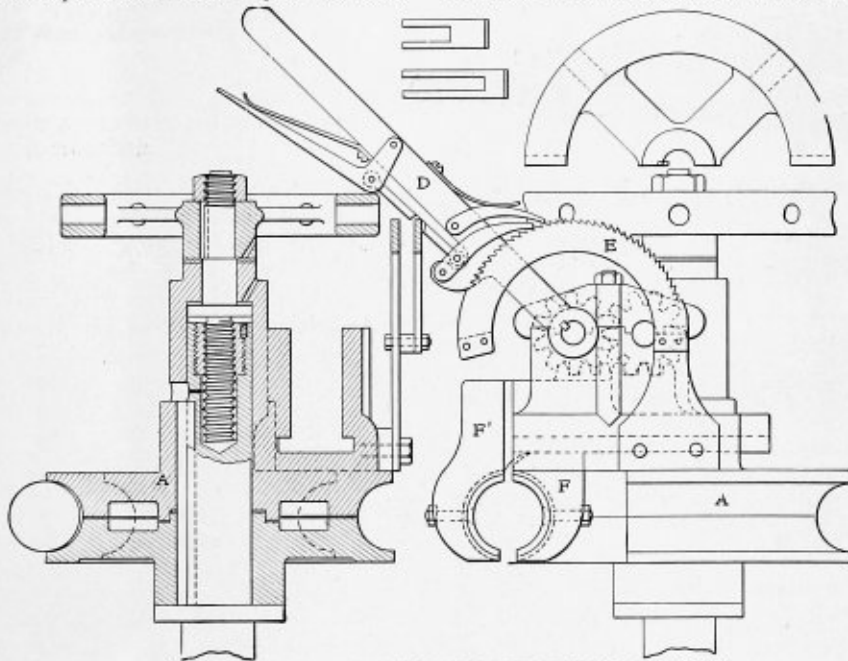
DETAILS OF THE AUTOMATIC PIPE-BENDING MACHINE.
